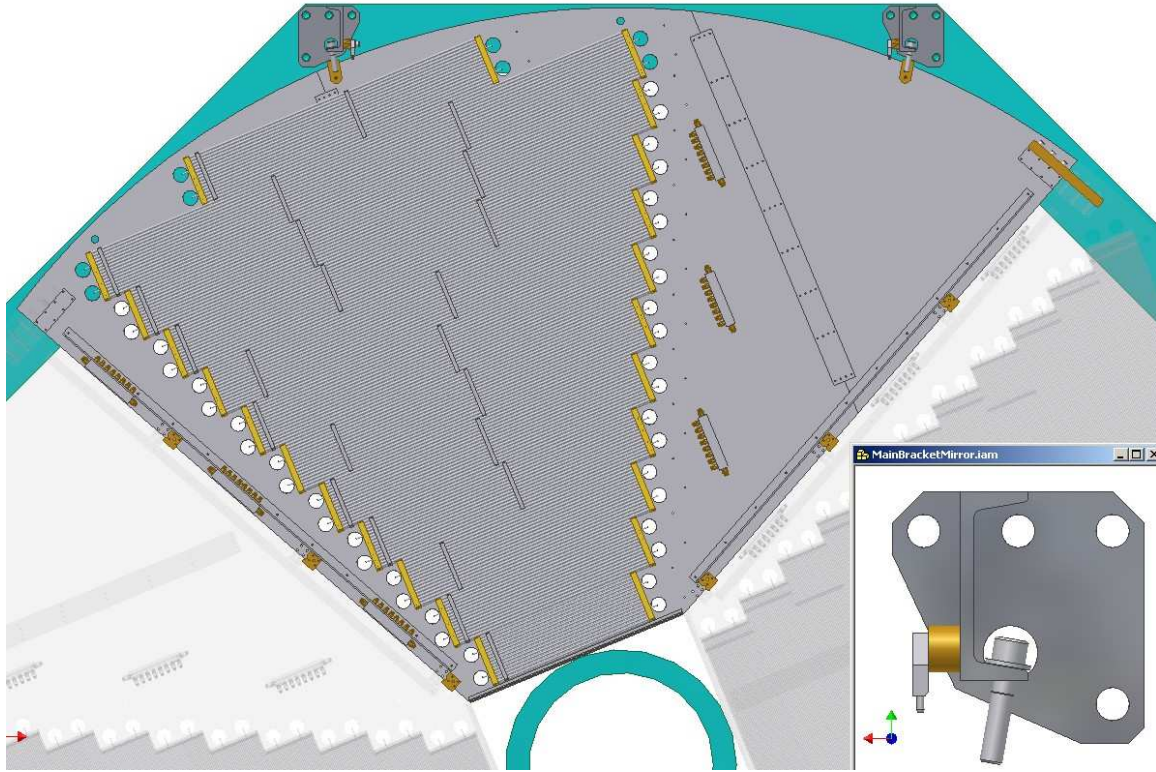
Details of the hanging brackets used to support the octant plate wheel assemblies.
